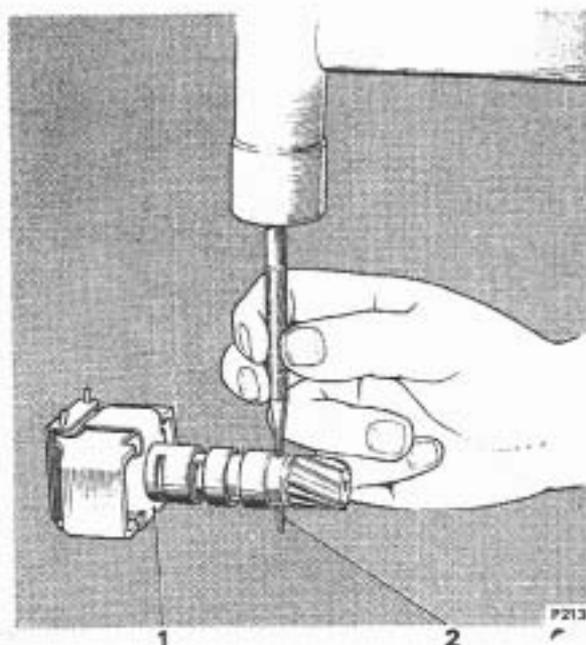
REMOVING GOVERNOR DRIVEN GEAR RETAINING PIN
